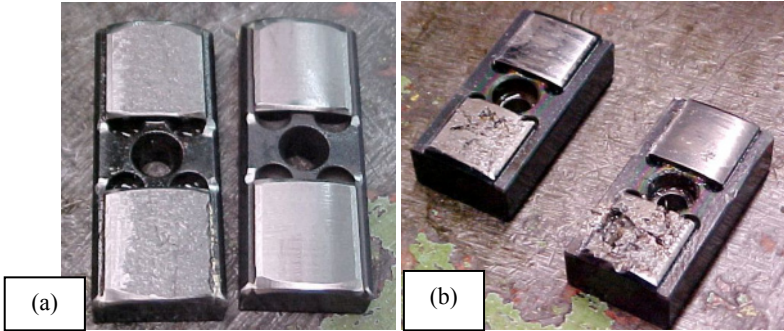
Scoring marks on the side cutting edge of a PCD insert due to insufficient backtaper
